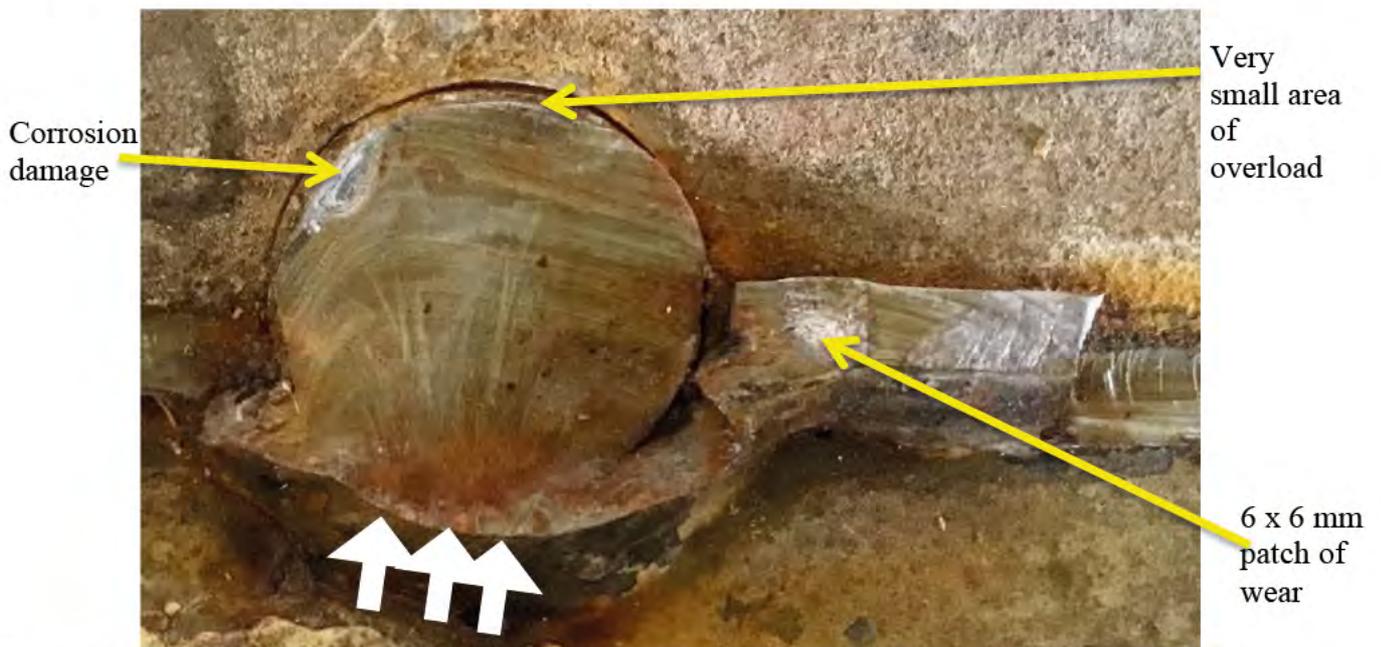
Showing fatigue fracture surface of Rod 8. Initiation at weld rod interface highlighted with white arrows.
